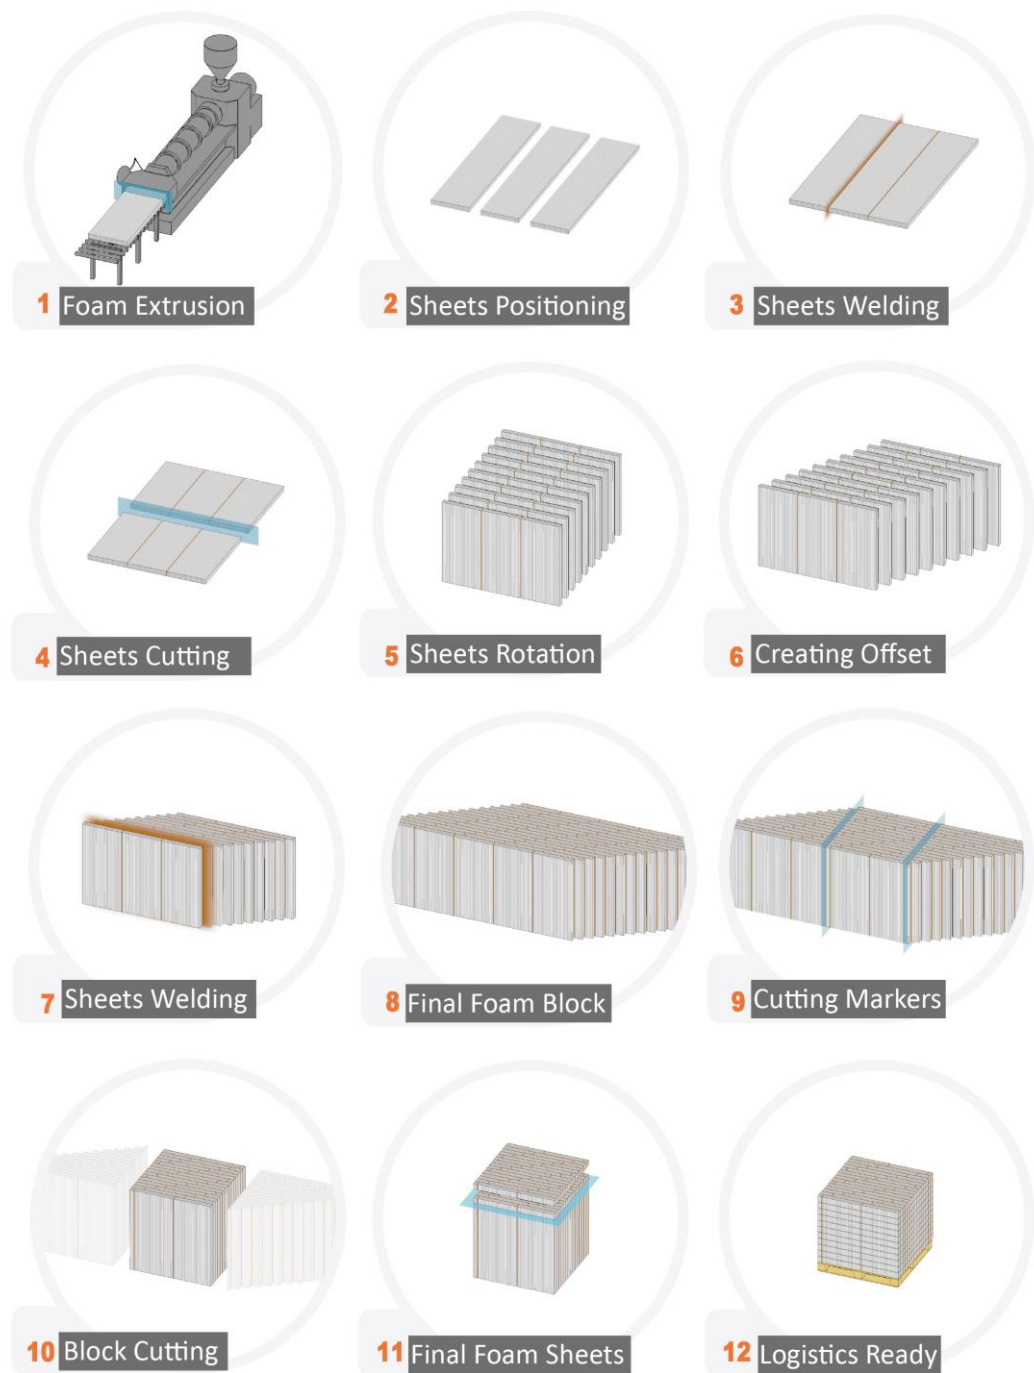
Schematic illustration of the post-processing steps performed on strand PET foam sheets. Steps 3 and 7 involve welding; Steps 4, 9, and 11 involve cutting.
